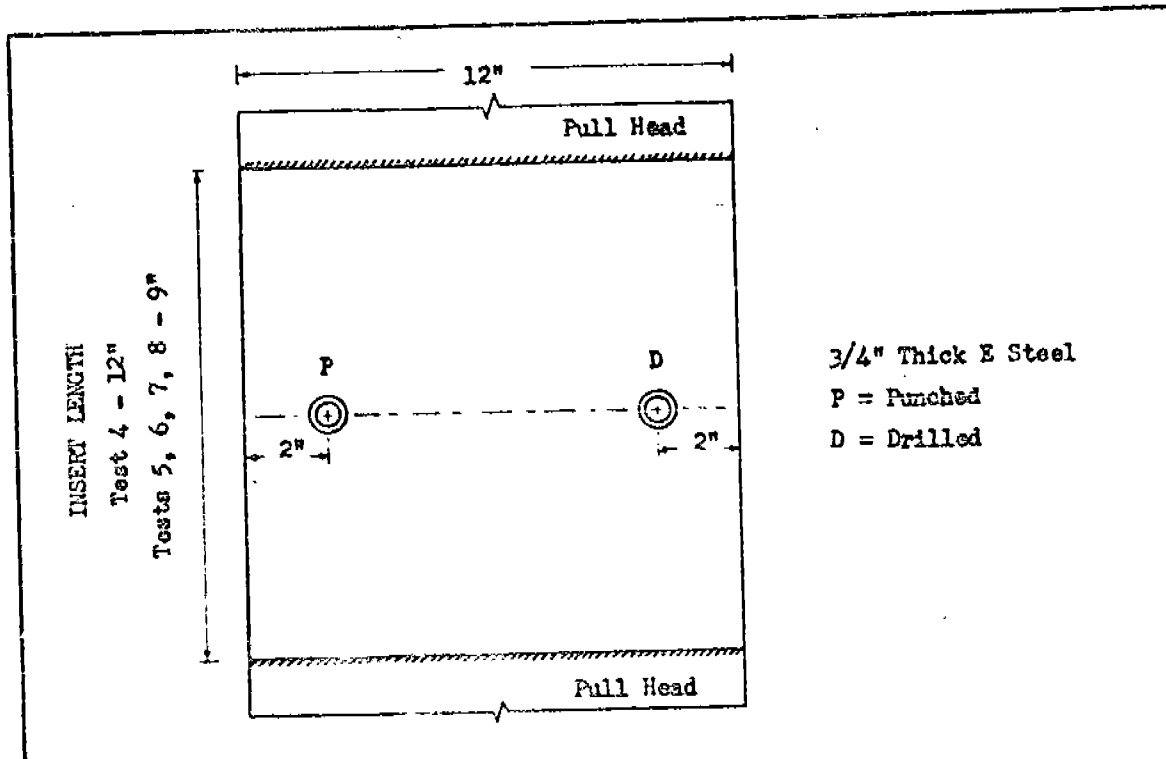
DETAILS OF 3/4- x 12-in. SPECIMEN
